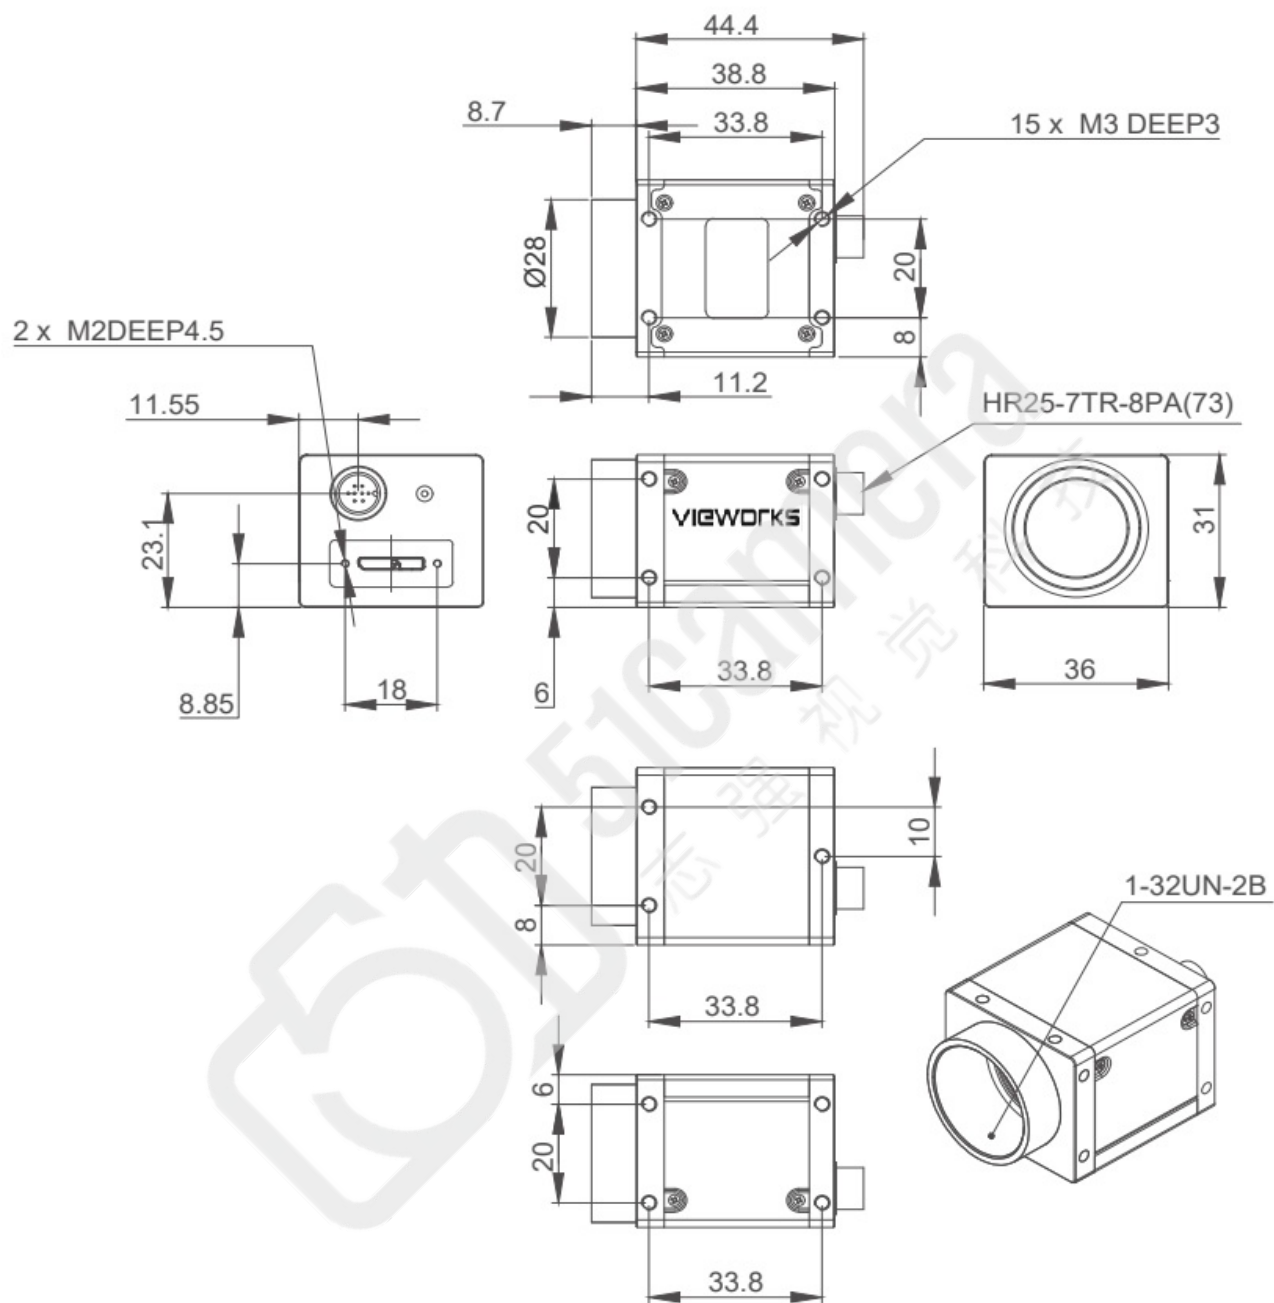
Mechanical Dimension (VZ-12MU-M/C23H00, VZ-12MU-M/C32H10)
